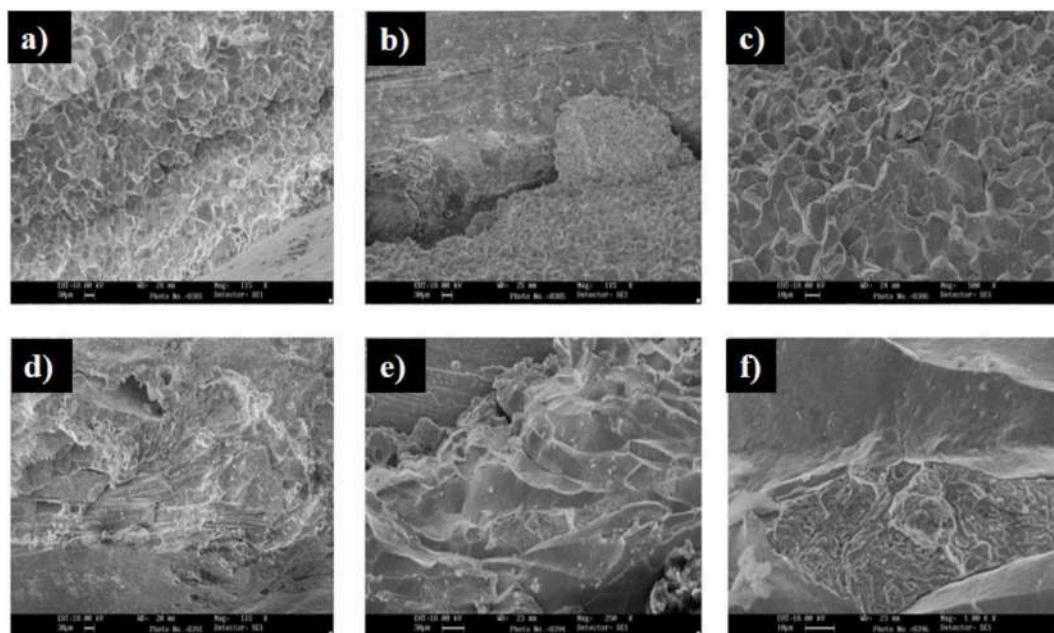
Tensile tests samples fracture surface appearance at welding speed of 200 mm/min, for laser power of a) 300W, b) 350W, c) 400W, laser power of 400W for d) 0 mm, e) 2 mm, f) 4 mm.
